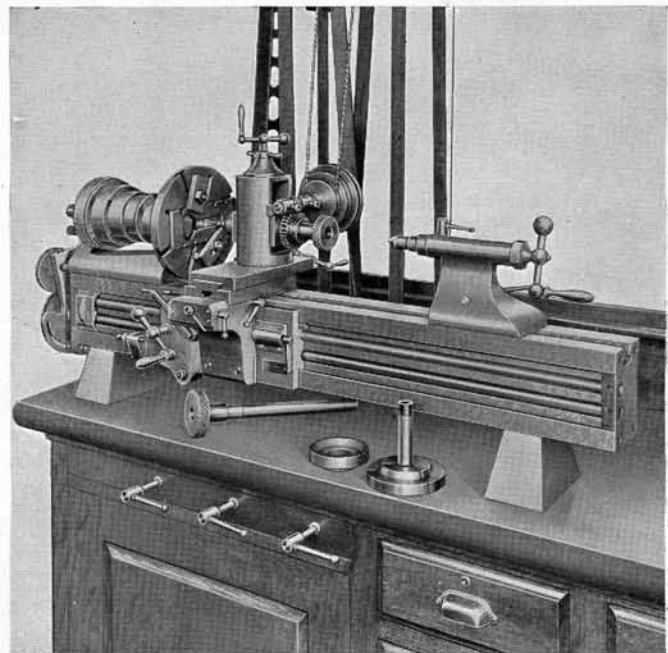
Rivett 608 (4 N.S.) lathe on cabinet with countershaft drive and Traverse Miller finishing contour of a stamping die
